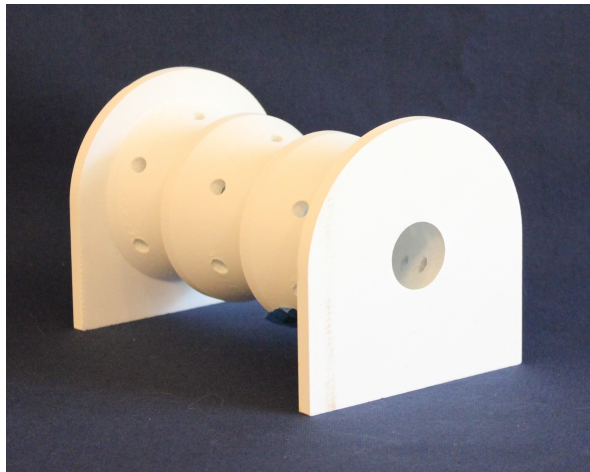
SISO - Series of Nozzles with Radial and Axial Perforations - Prototype - Forward View
